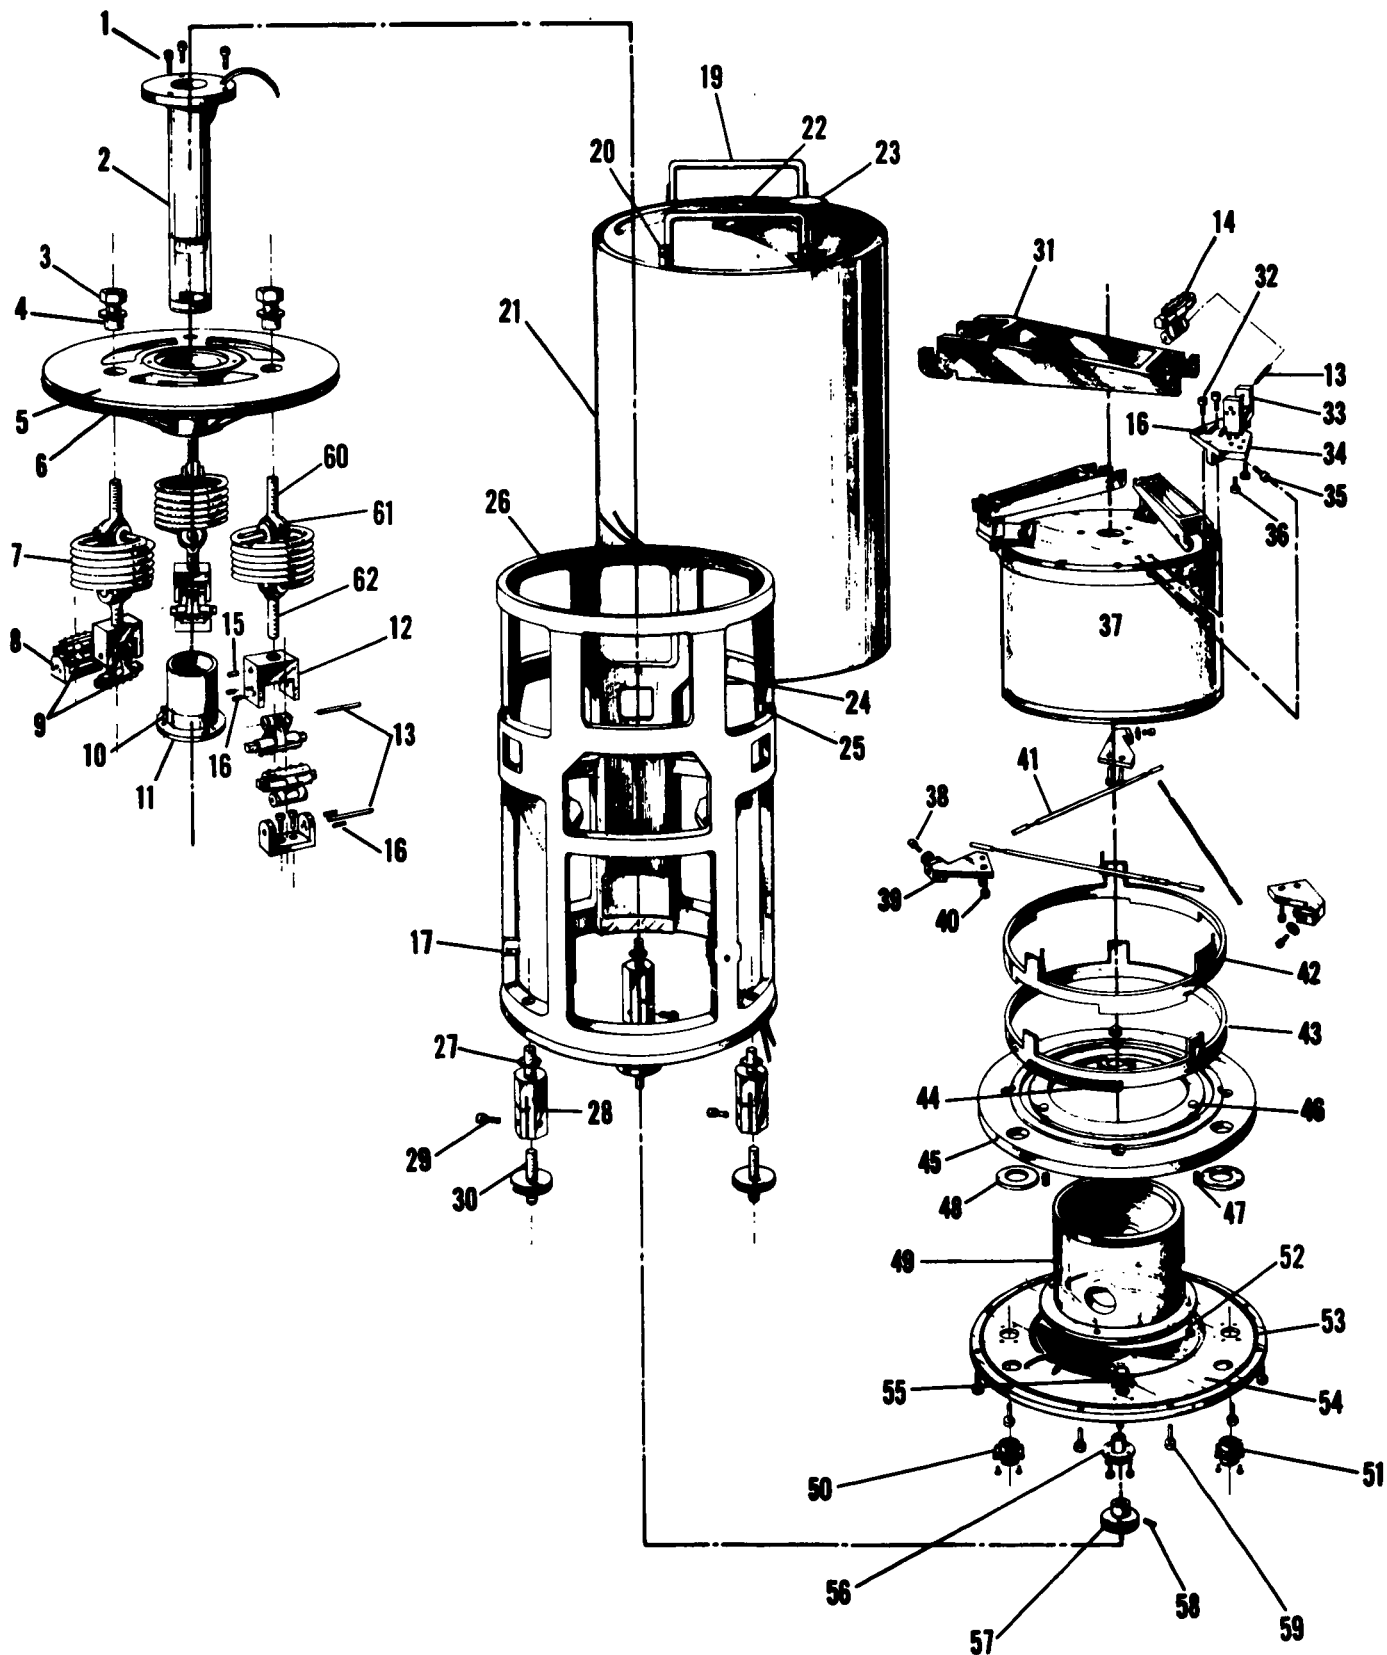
Exploded View, Johnson Matheson Seismometer, Model 6480
